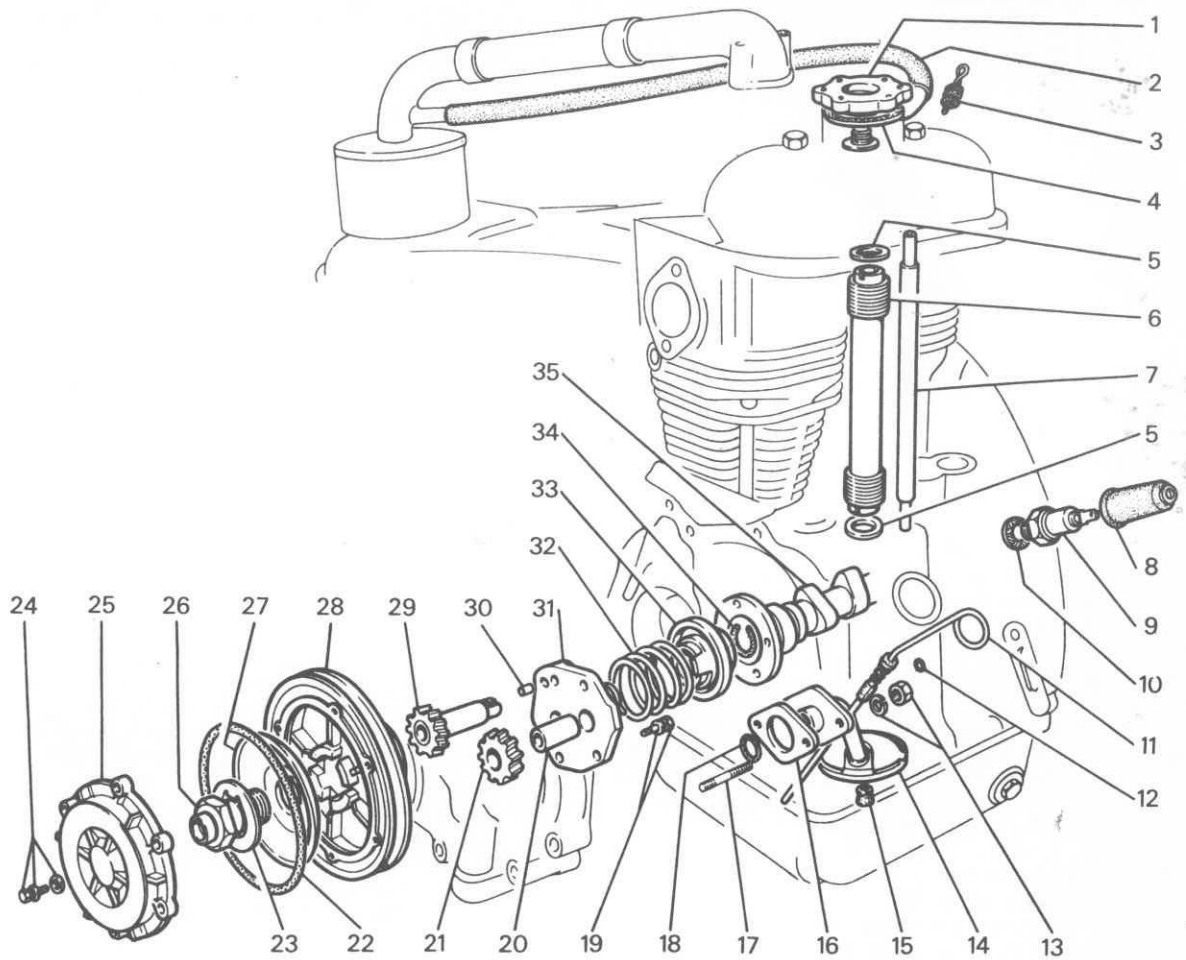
24 Exploded details of the lubricating system. The centrifugal oil filter is on the left with the oil pump in the centre
